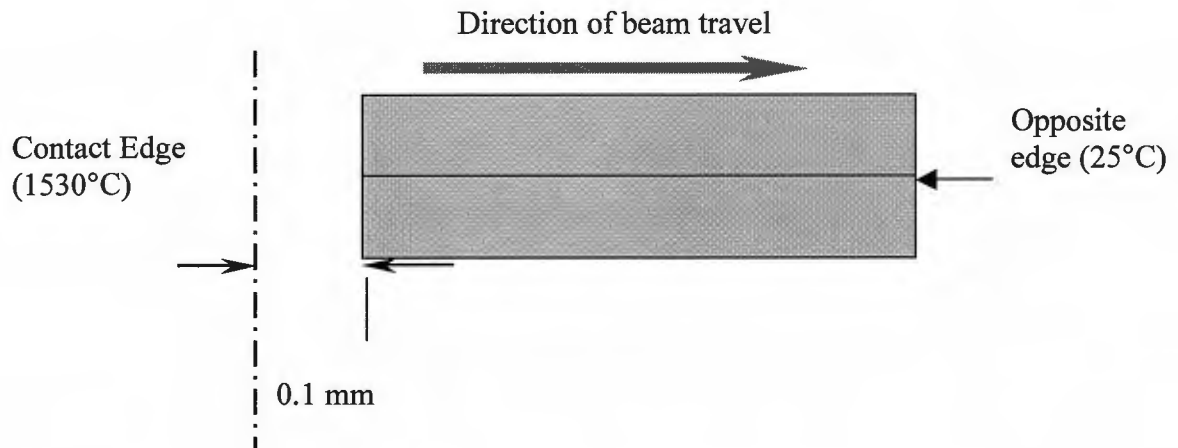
Geometry for identifying hole spacing in vent hole method
